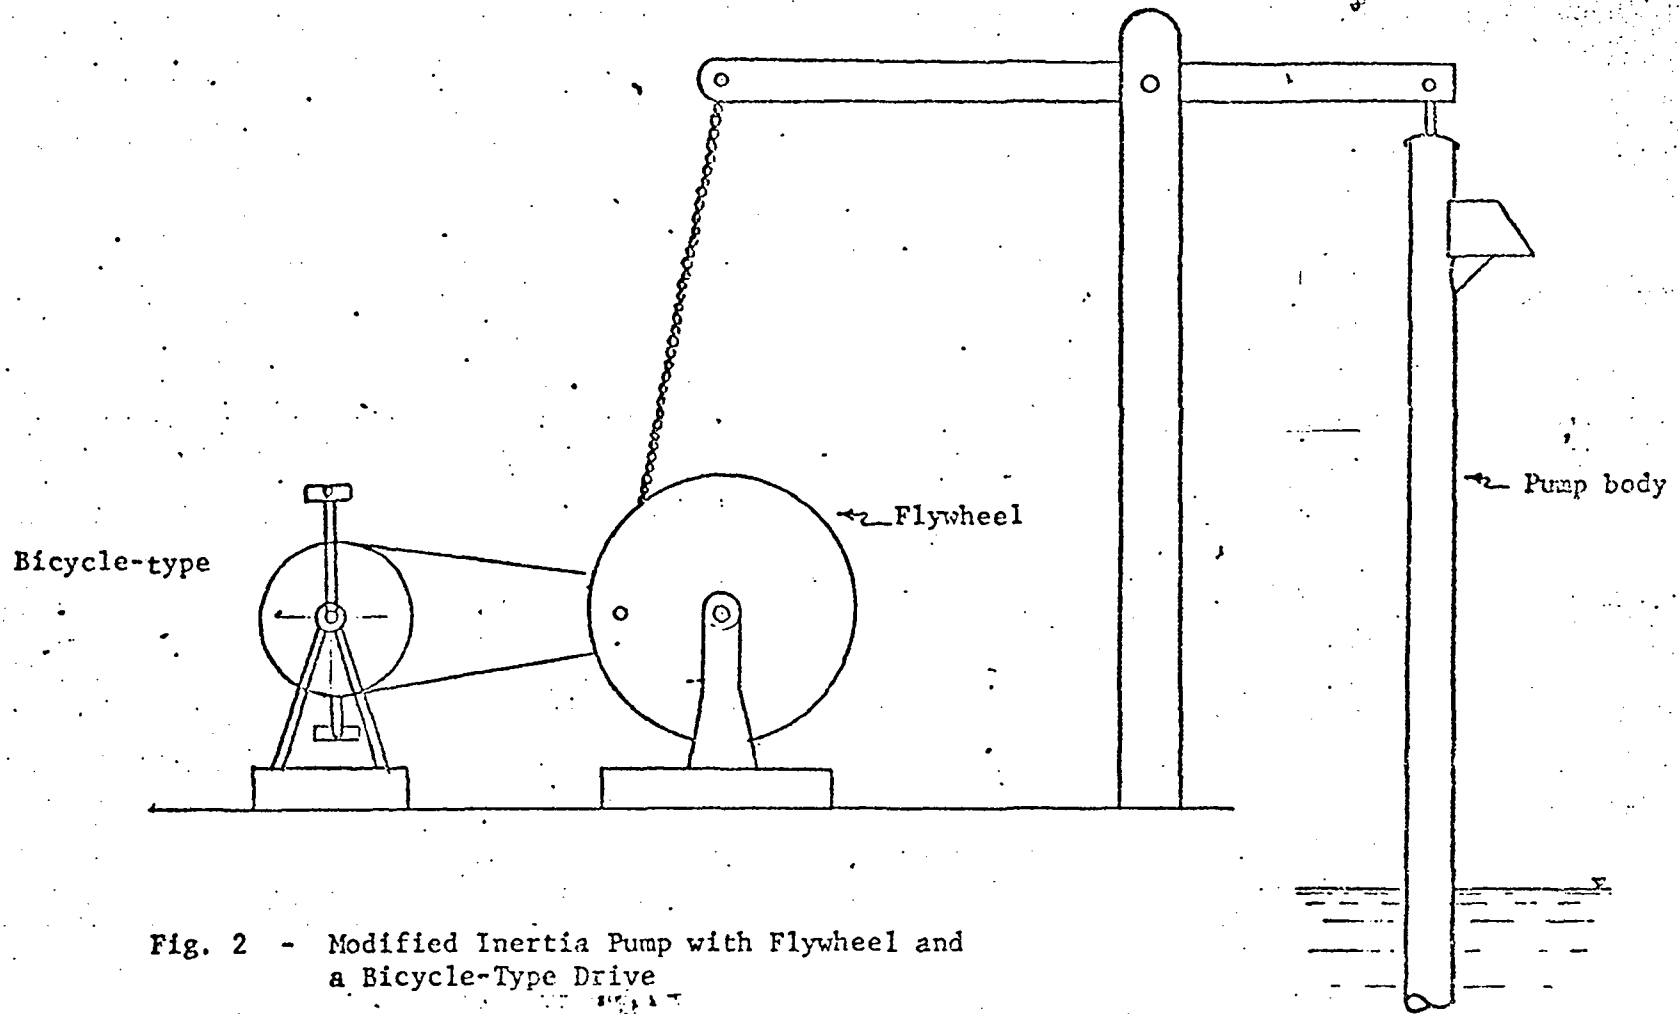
Modified Inertia Pump with Flywheel and a Bicycle-Type Drive
